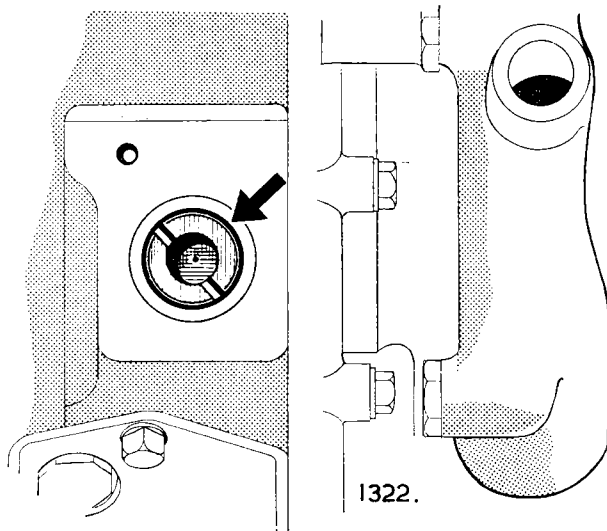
Showing the position of the distributor drive shaft offset when Number 6 (front) piston is on Top Dead Centre
